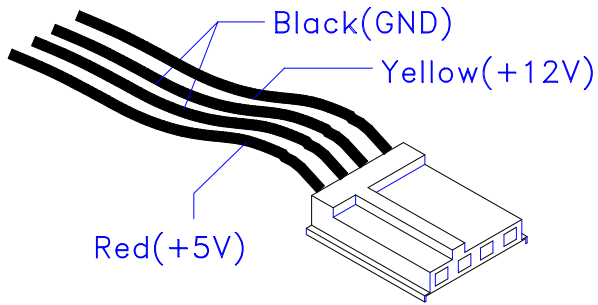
4 3.5-In. Diskette Drive Power Cable Connector
